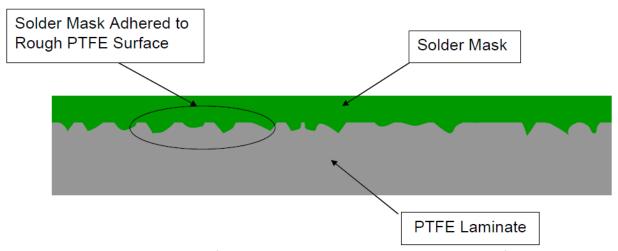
Illustration of soldermask wetting and adhesion to rough PTFE surface.
